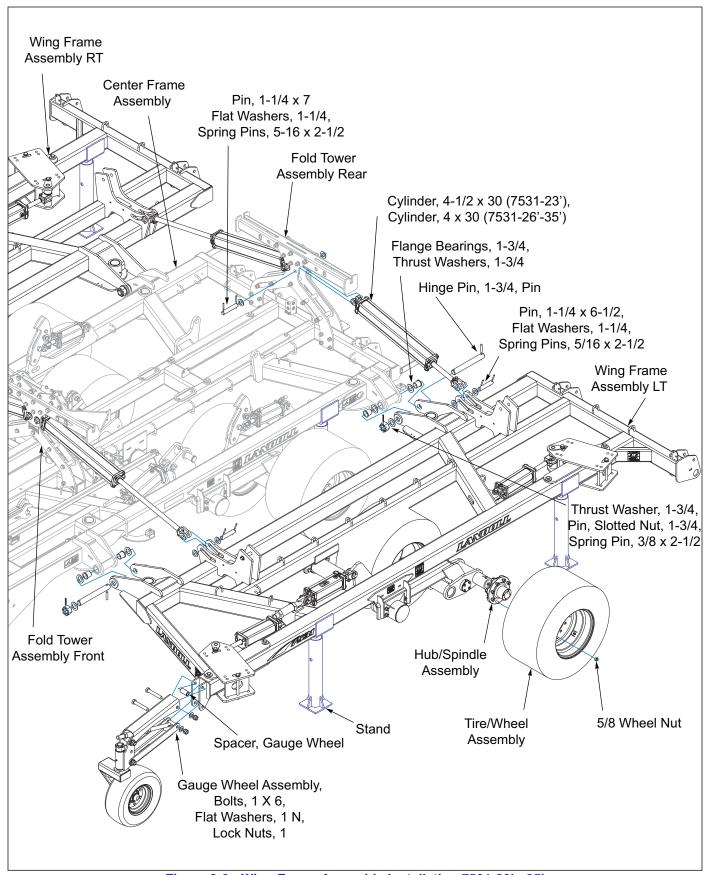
Wing Frame Assembly Installation 7531-23' - 35'
